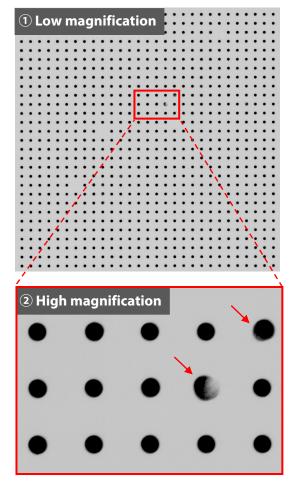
Fluoroscopic Images of Solder Bumps (Red arrow: Defect)
